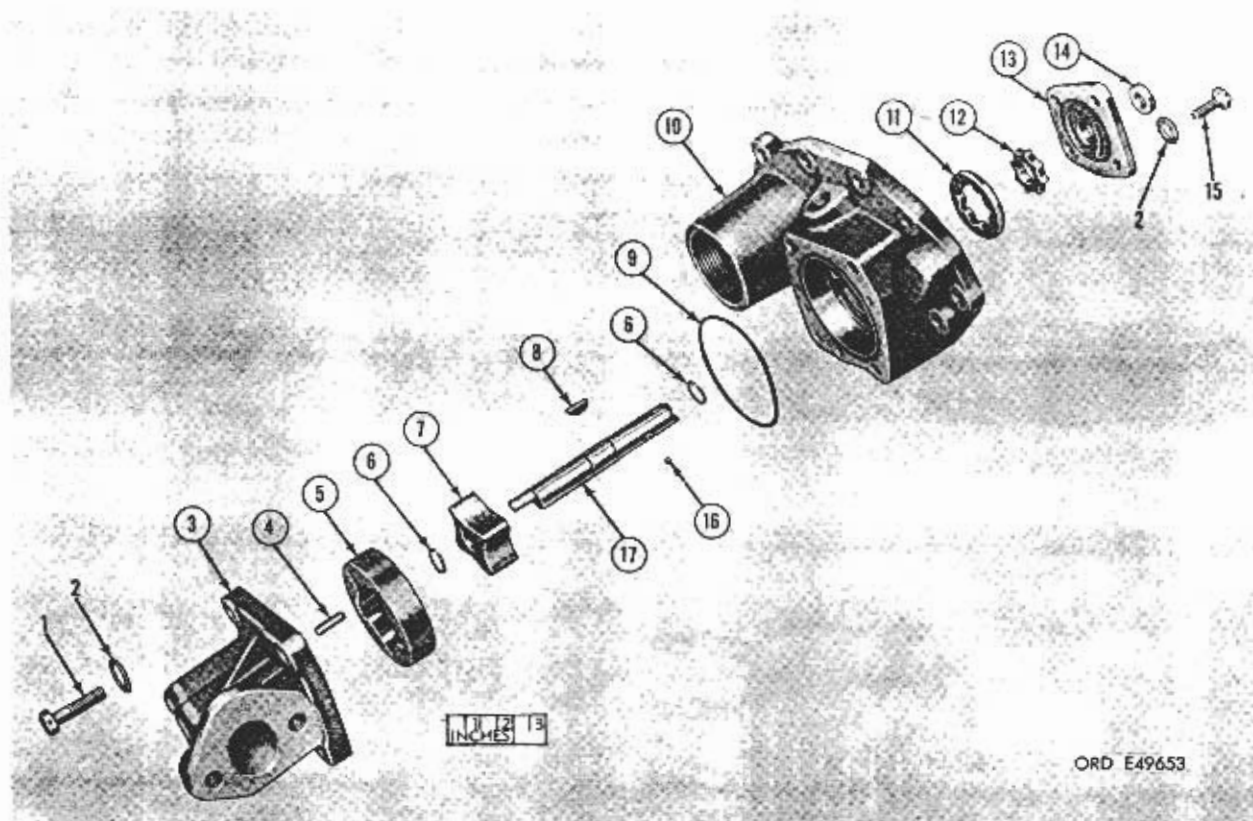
OIL PUMP ASSEMBLY AND ASSOCIATED PARTS - EXPLODED VIEW.
